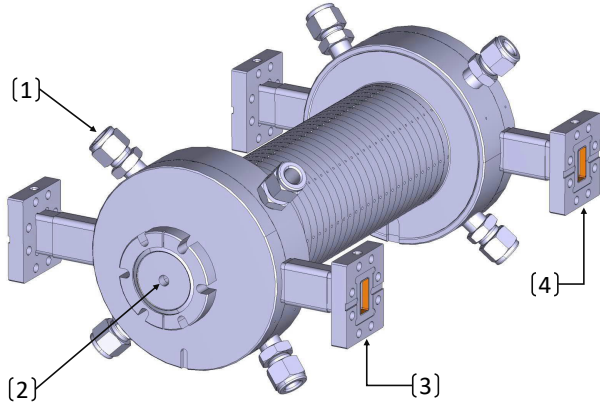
Isometric view of a rendering of the full structure assembly with labels showing one of the cooling water inlets (1), the beam pipe entry (2), and the waveguide input (3) and outputs one one side (4).
